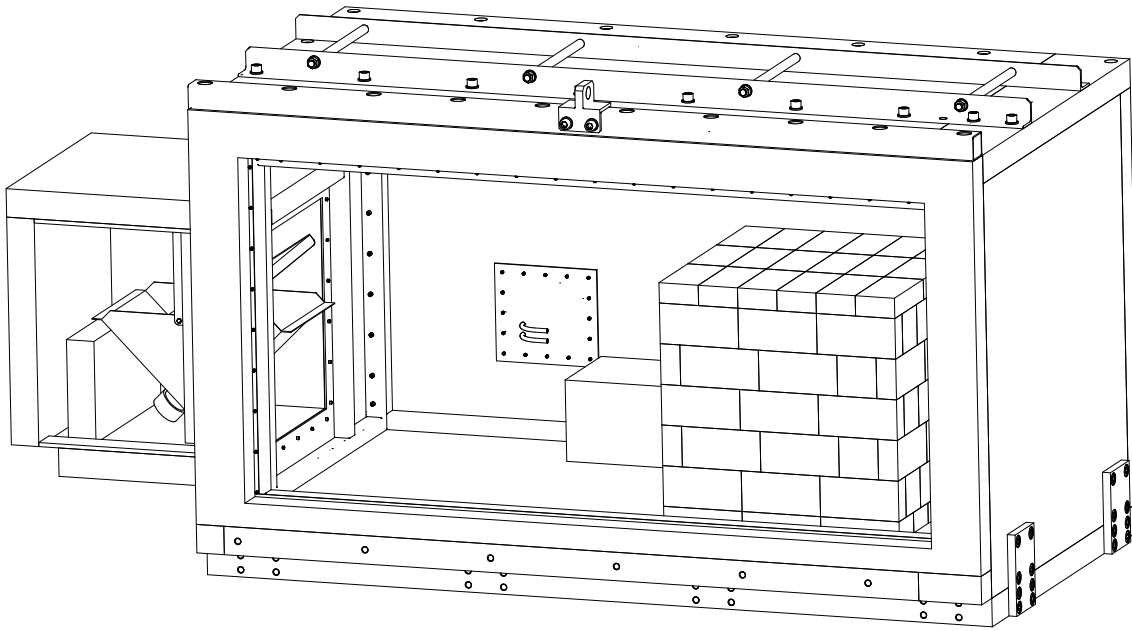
Mechanical CAD drawing of the new neutron and EMI shielding for the COBRA R&D set-up. Cut-away view through the front door and the shielding extension at the left. In the centre one of the two feedthroughs, which are used for calibration tubes guiding radioactive sources mounted to a wire, is visible in the back wall. The box in the centre symbolises the preamplifier electronics used to read out the detectors hidden in the centre of the lead and copper shielding (right half of the interior). Drawing by the author using VariCAD [Var13]. Design of all parts by the author except for the BPE lifting support.
